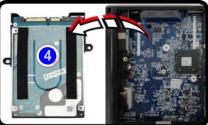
6 Secondary HDD Assembly Screws & Removal
